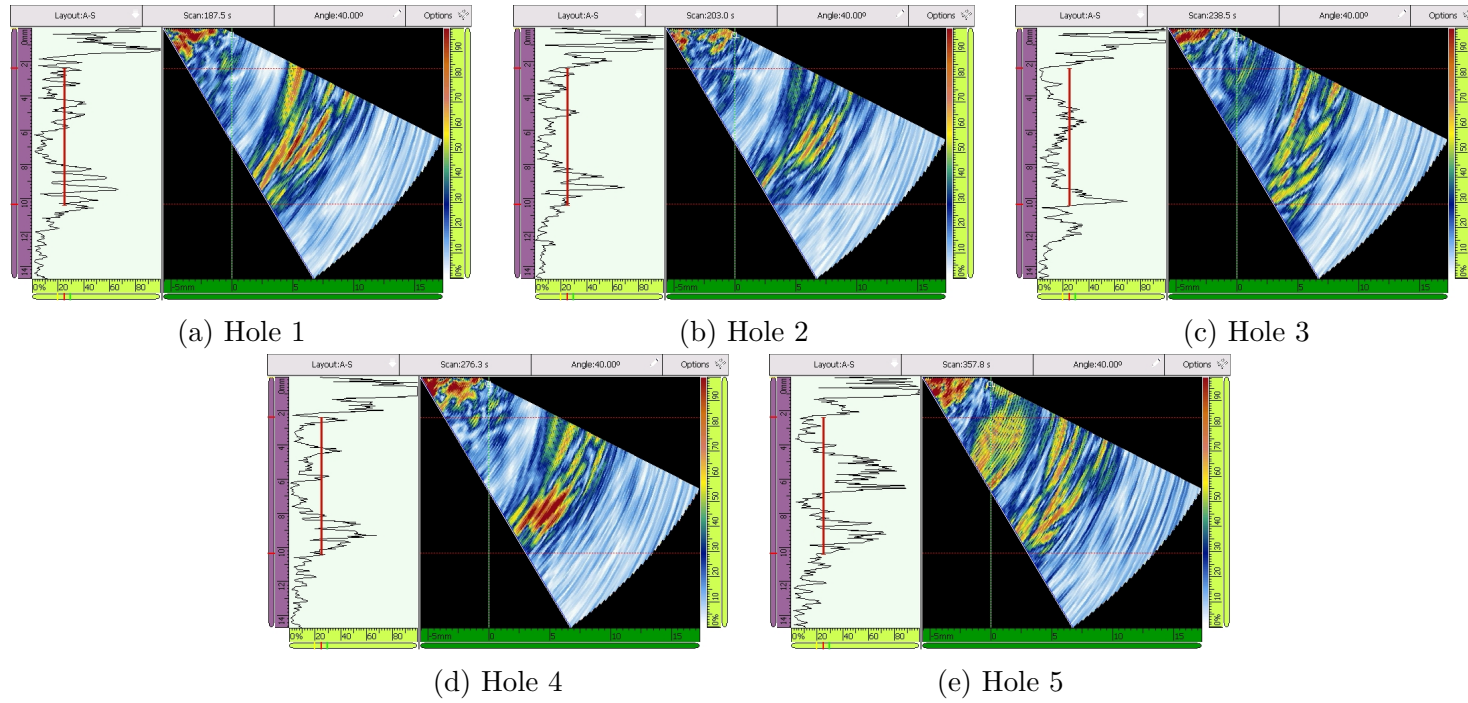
Phased Array Inspection of Holes Drilled in Unidirectional CFRP Composite with HSS Drill
